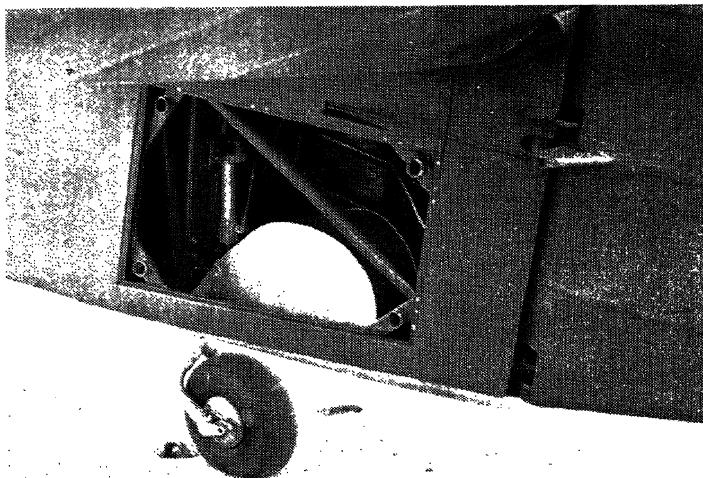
RETRACTABLE TAIL WHEEL (INSPECTION COVER REMOVED)
